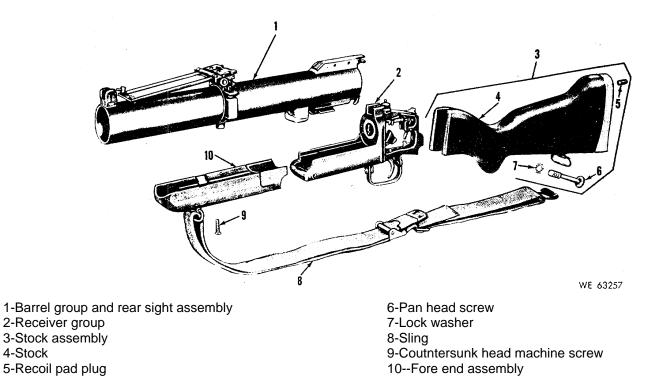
40-MM grenade launcher M79-partial disassembly.
